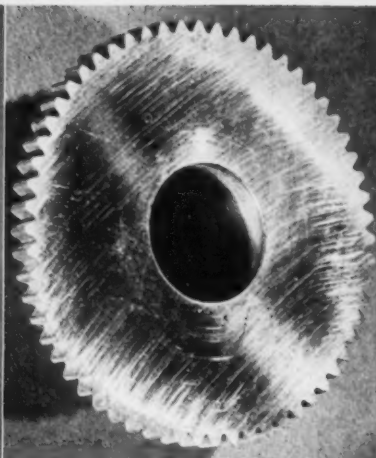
Is a gear as it appeared under visual inspection.
